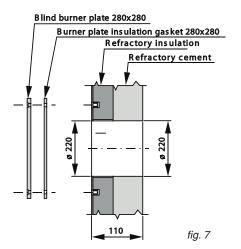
#### DETAIL FOR DOOR DRILLING XC-K oil 150
